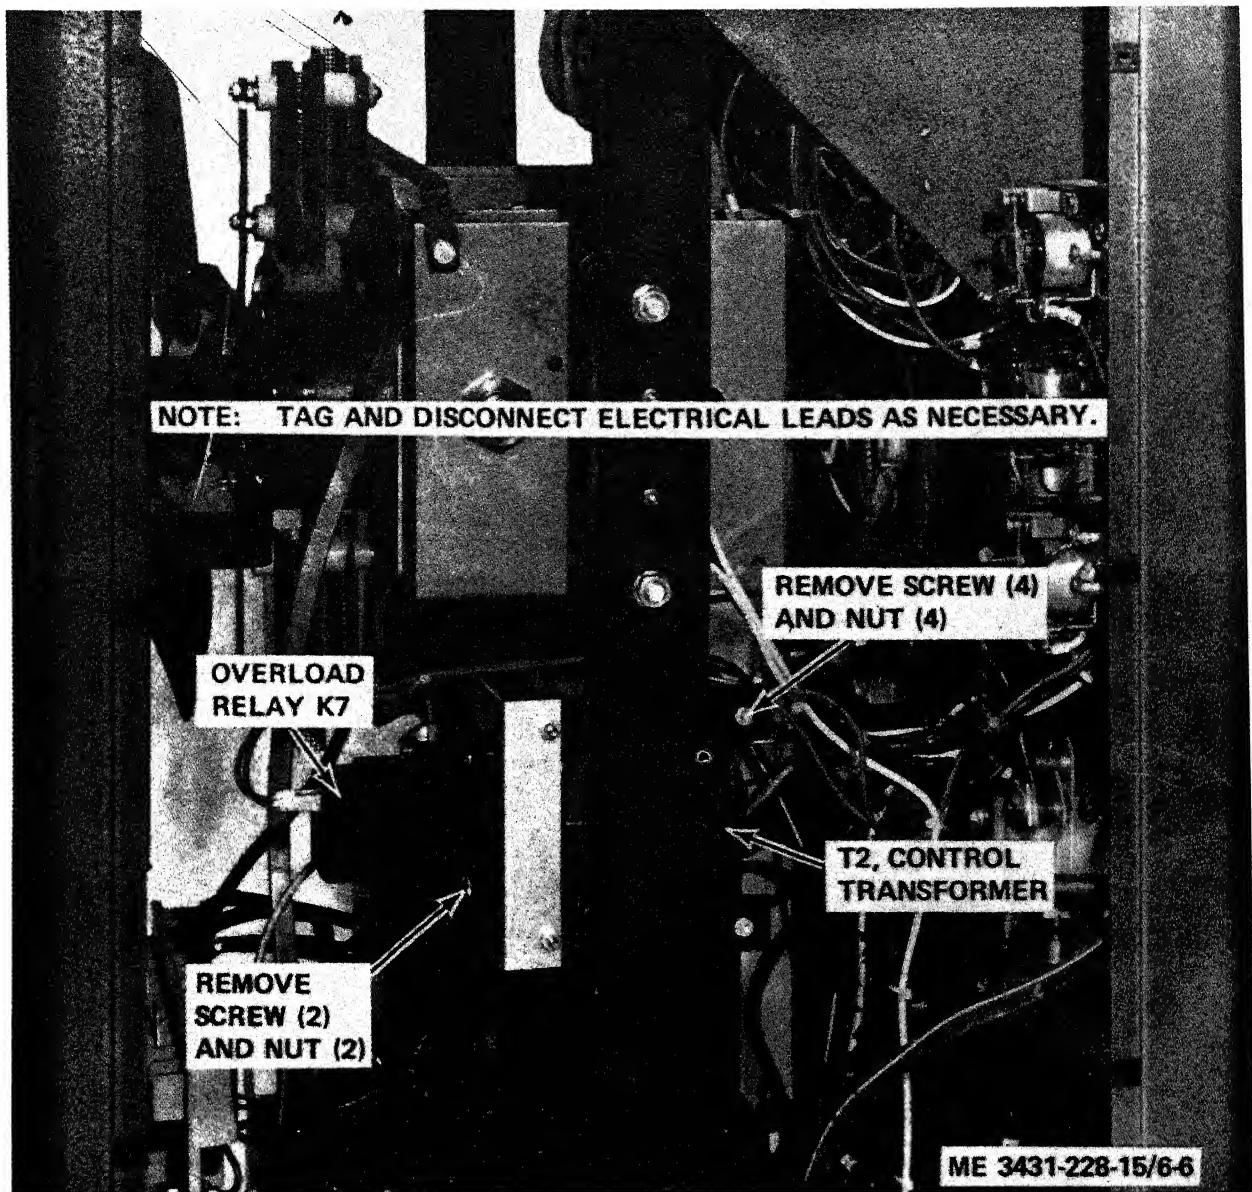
Overload relay K7 and control transformer T2, removal and installation.
